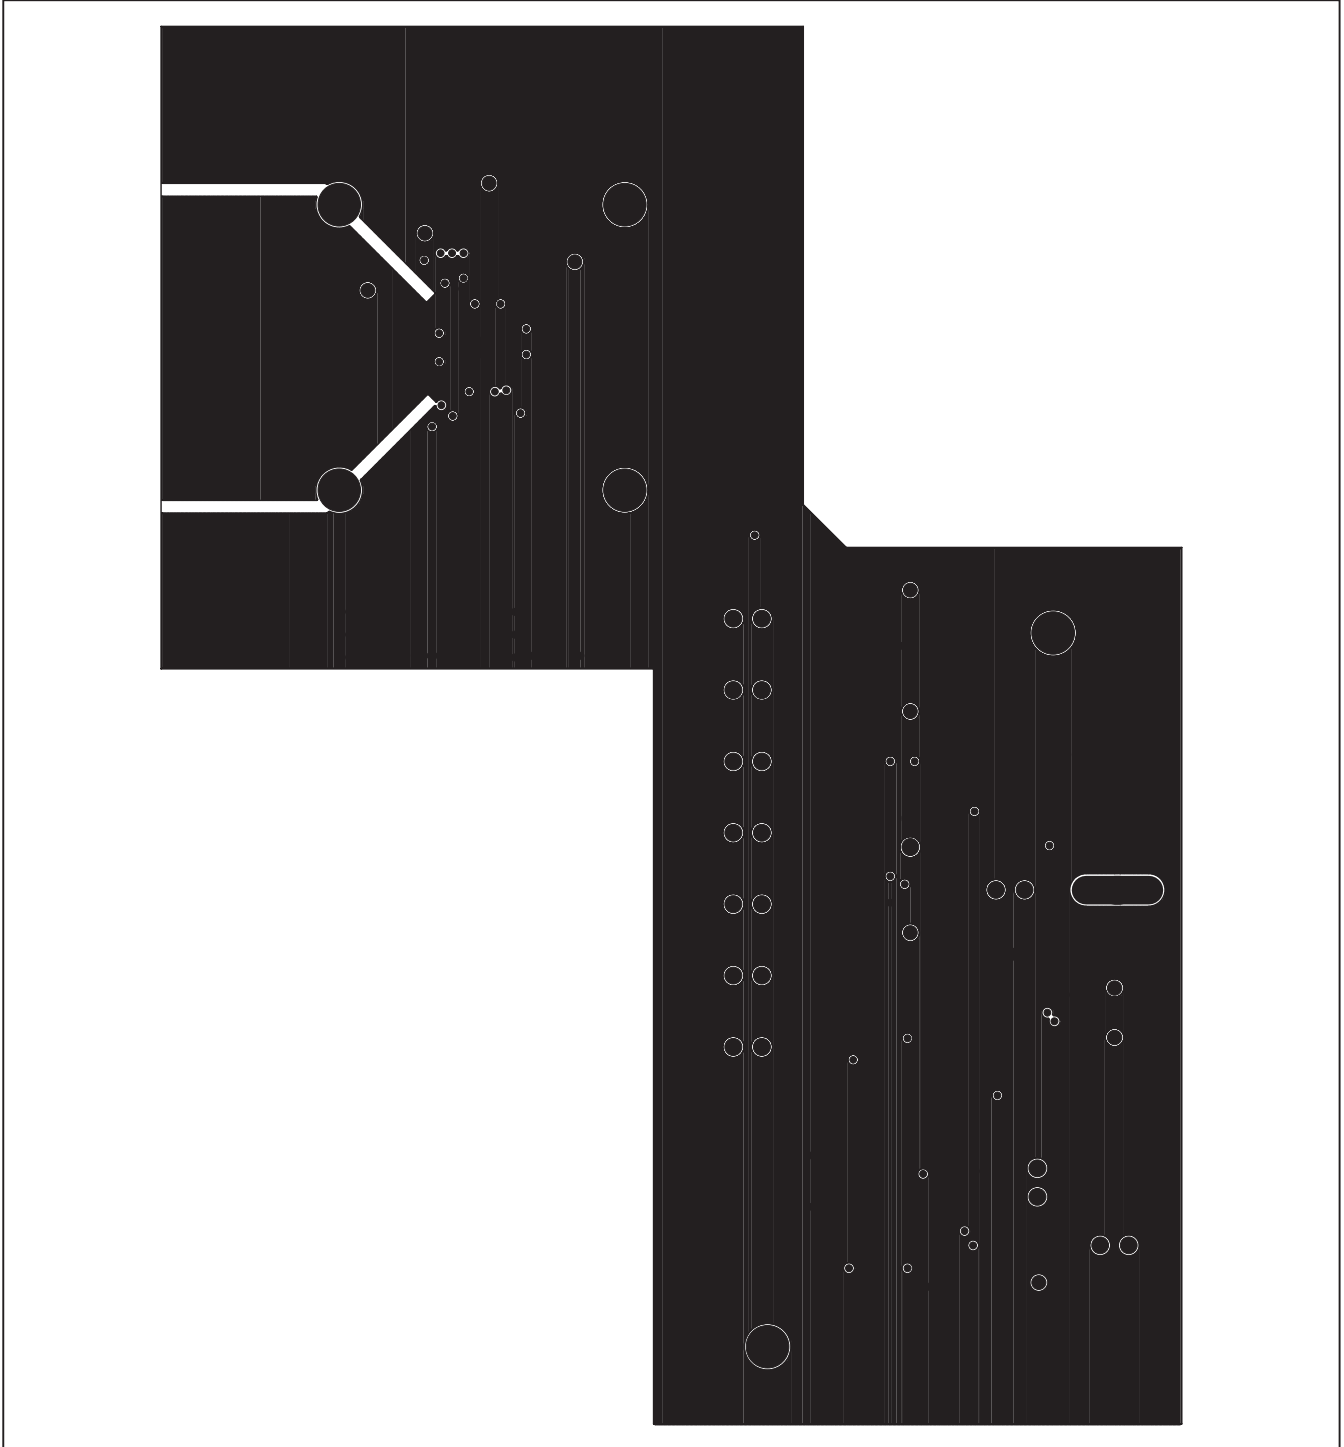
MAX3798 EV Kit PCB Layout—Ground Plane
